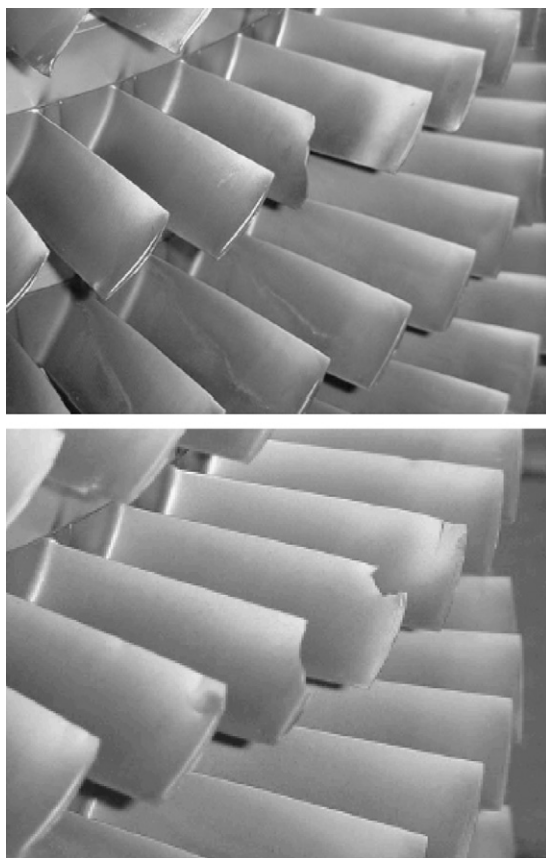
Blade failures due to excessive tip rubs.
